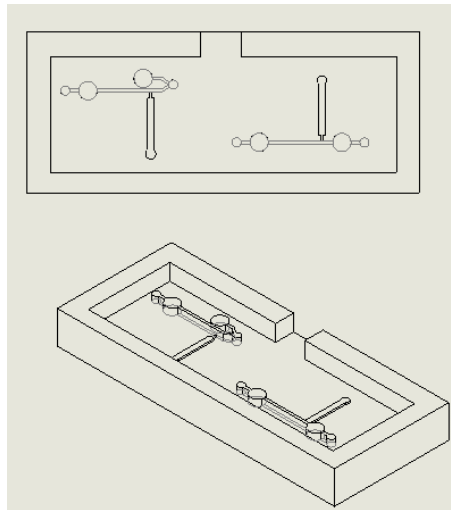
Technical drawing of the two read-outs design with the control read-out at a junction (left) and the control read-out in a straight channel before the trigger valve (right)
